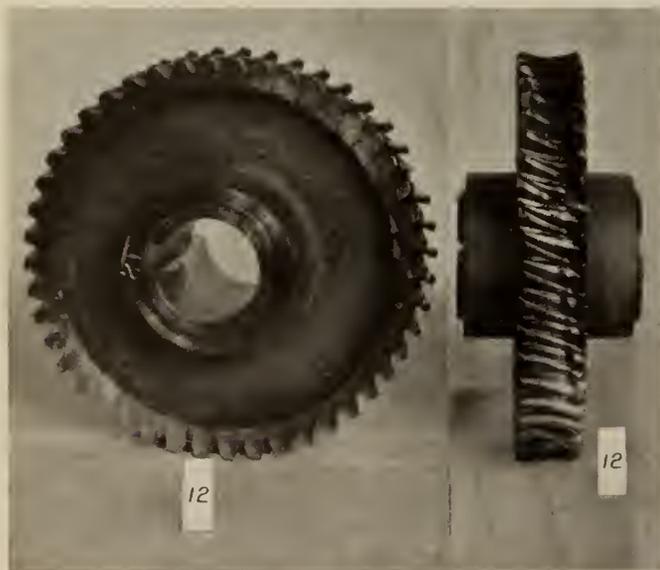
Worm Gear after Test to Destruction, .4 inch c.p., 30-degree p.a. to Mate Quadruple Thread Worm.
